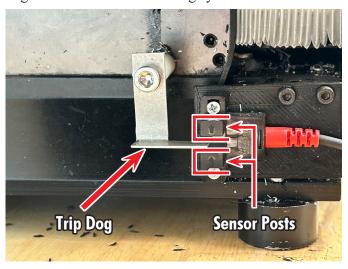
Y-axis on the mill and Z-axis on the chucker lathe.
